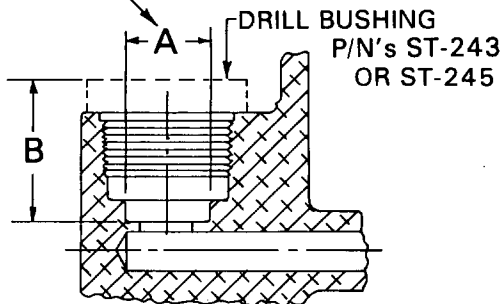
Section Through Crankcase Showing Recess for Installing Valve Seat
